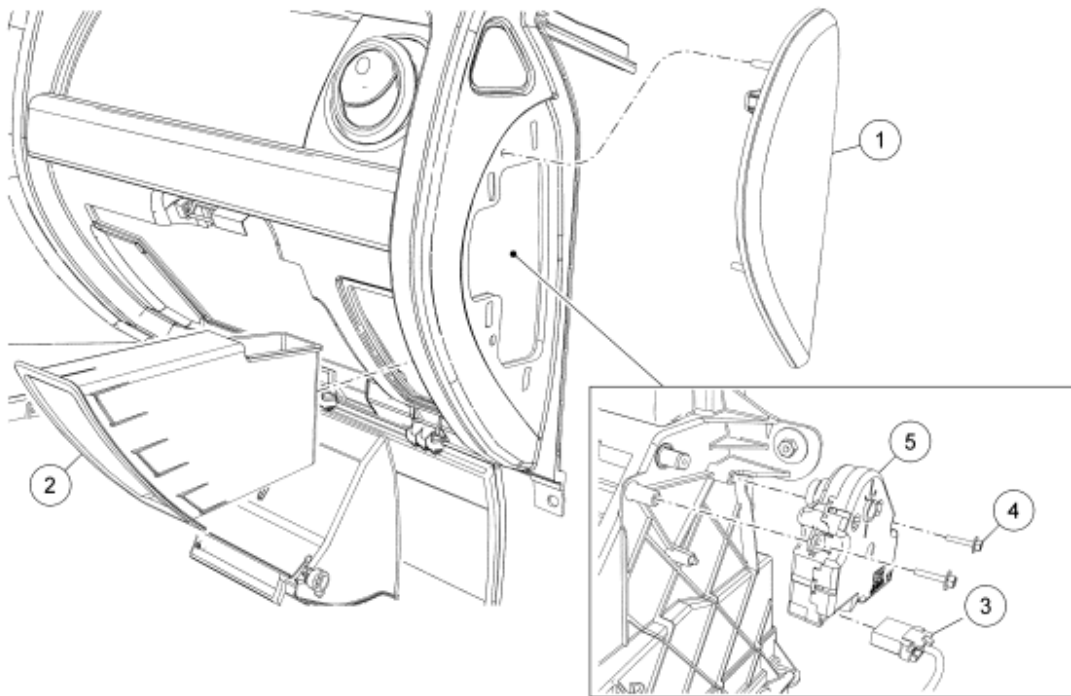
Exploded View Of In-Vehicle Temperature Sensor
